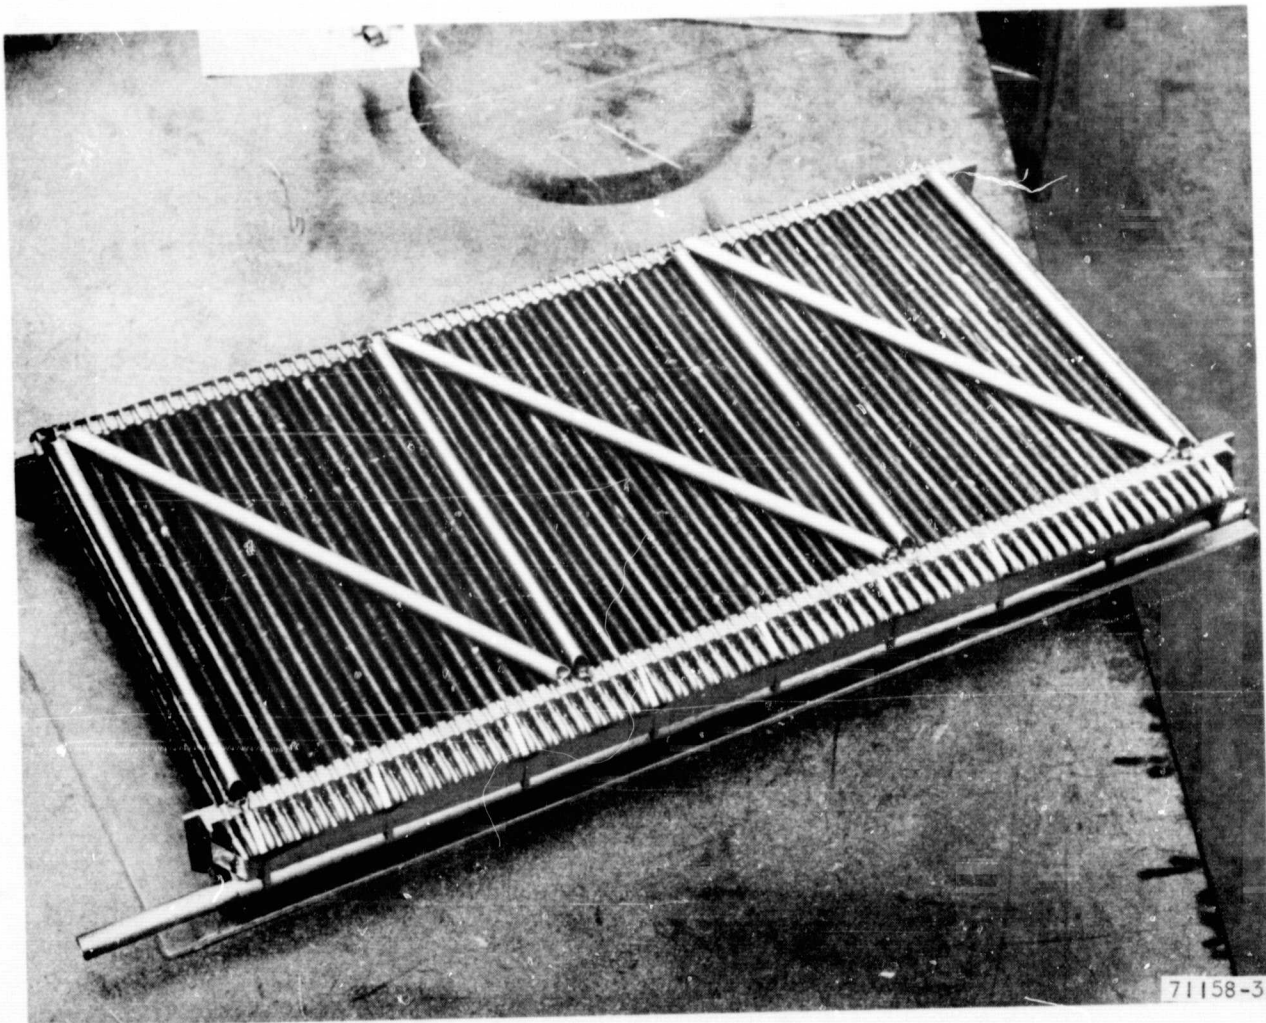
378 Finned Tube Test Specimen with Banding
